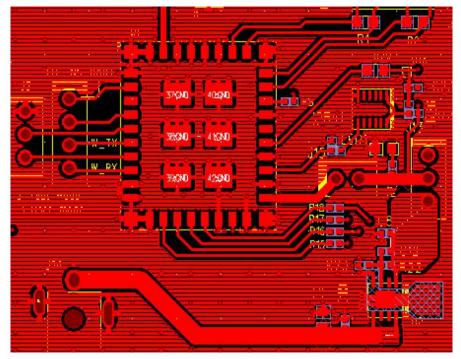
Power Supply Routing of the CC3000 EM Board
